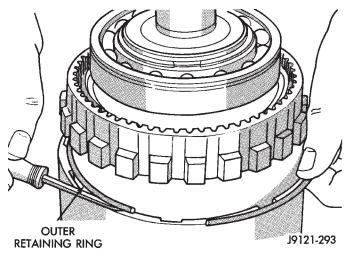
Clutch Drum Outer Retaining Ring Removal
